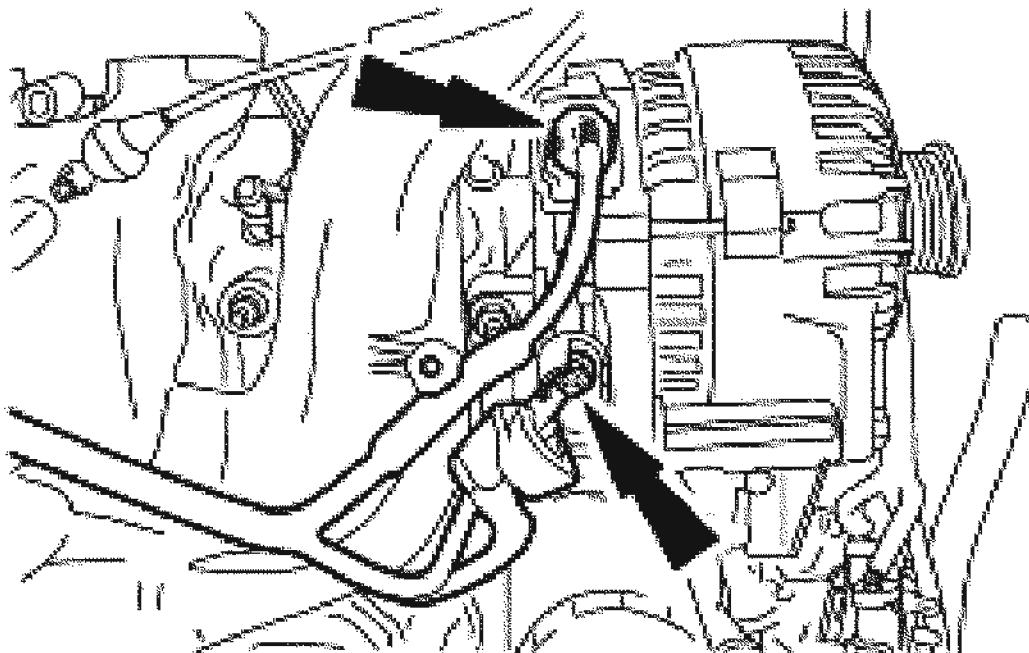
Removing RH Engine Mount Upper Bracket
